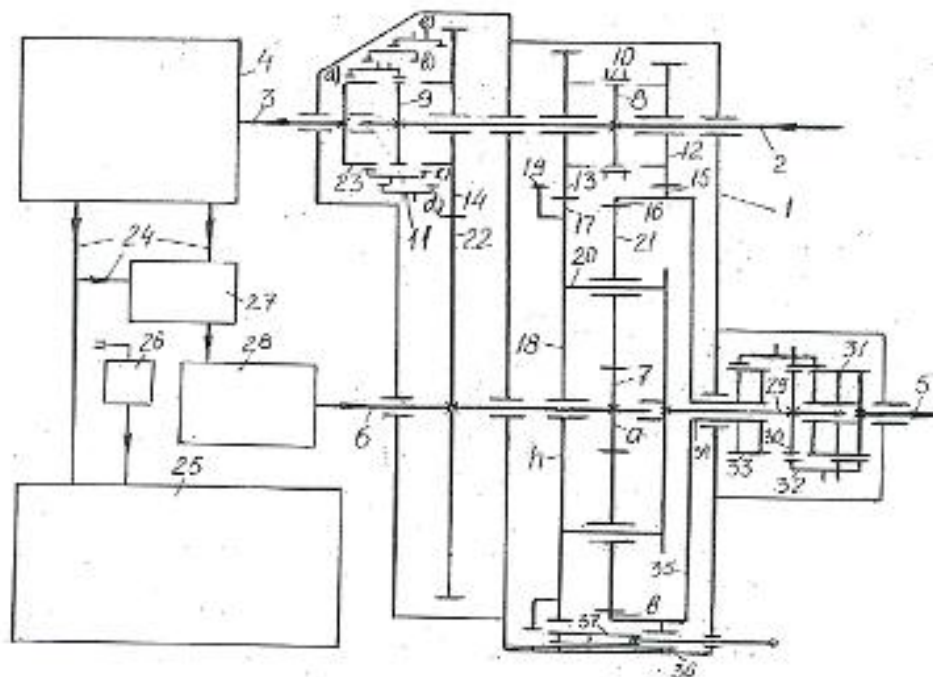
Kinematic layout of hybrid transmission with simple three-link planetary gear upon torque input and output from one reducer side – from the right.
